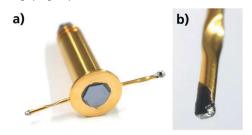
a) The gas filled filter chamber after a hermetic sealing with soldered silicon windows. b) The crimped and solder sealed filling tubes.
